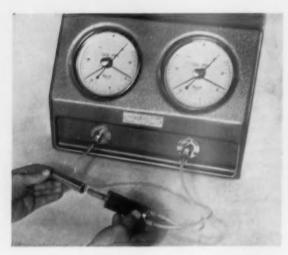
Plug gauge for simultaneously checking two diameters of a taper bore
